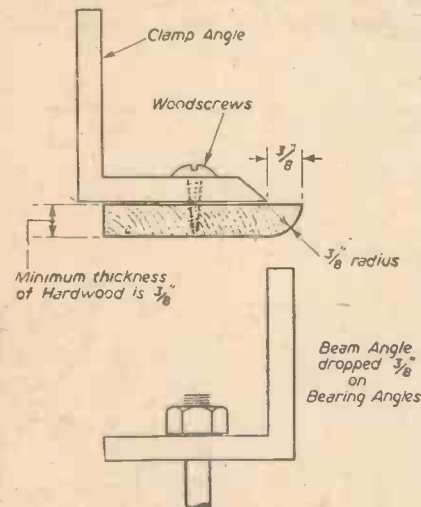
Suggested attachment for making 1/4in. radius folds.
